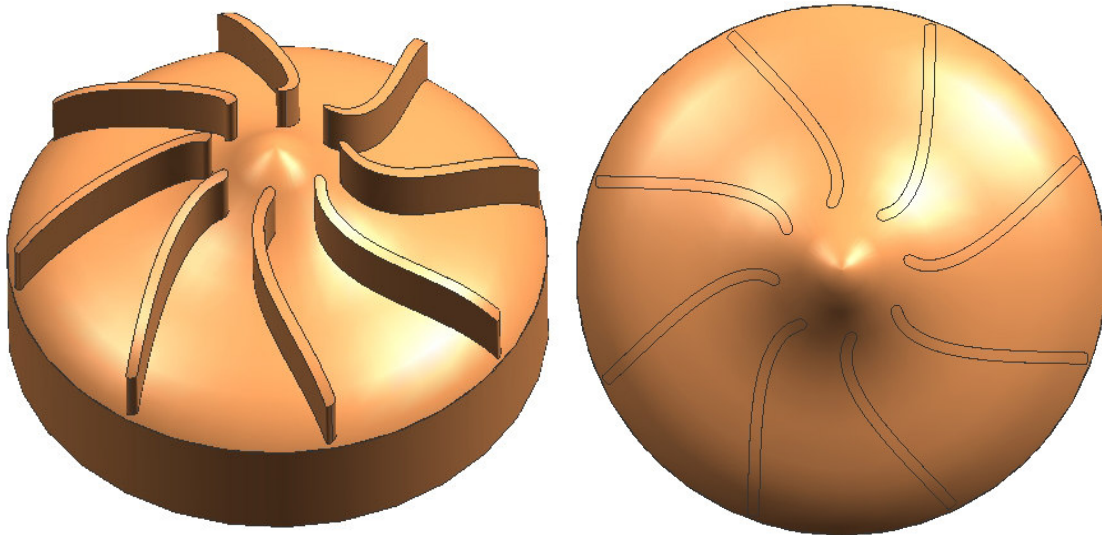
CAD Model of the Impeller of with constant blade thickness
